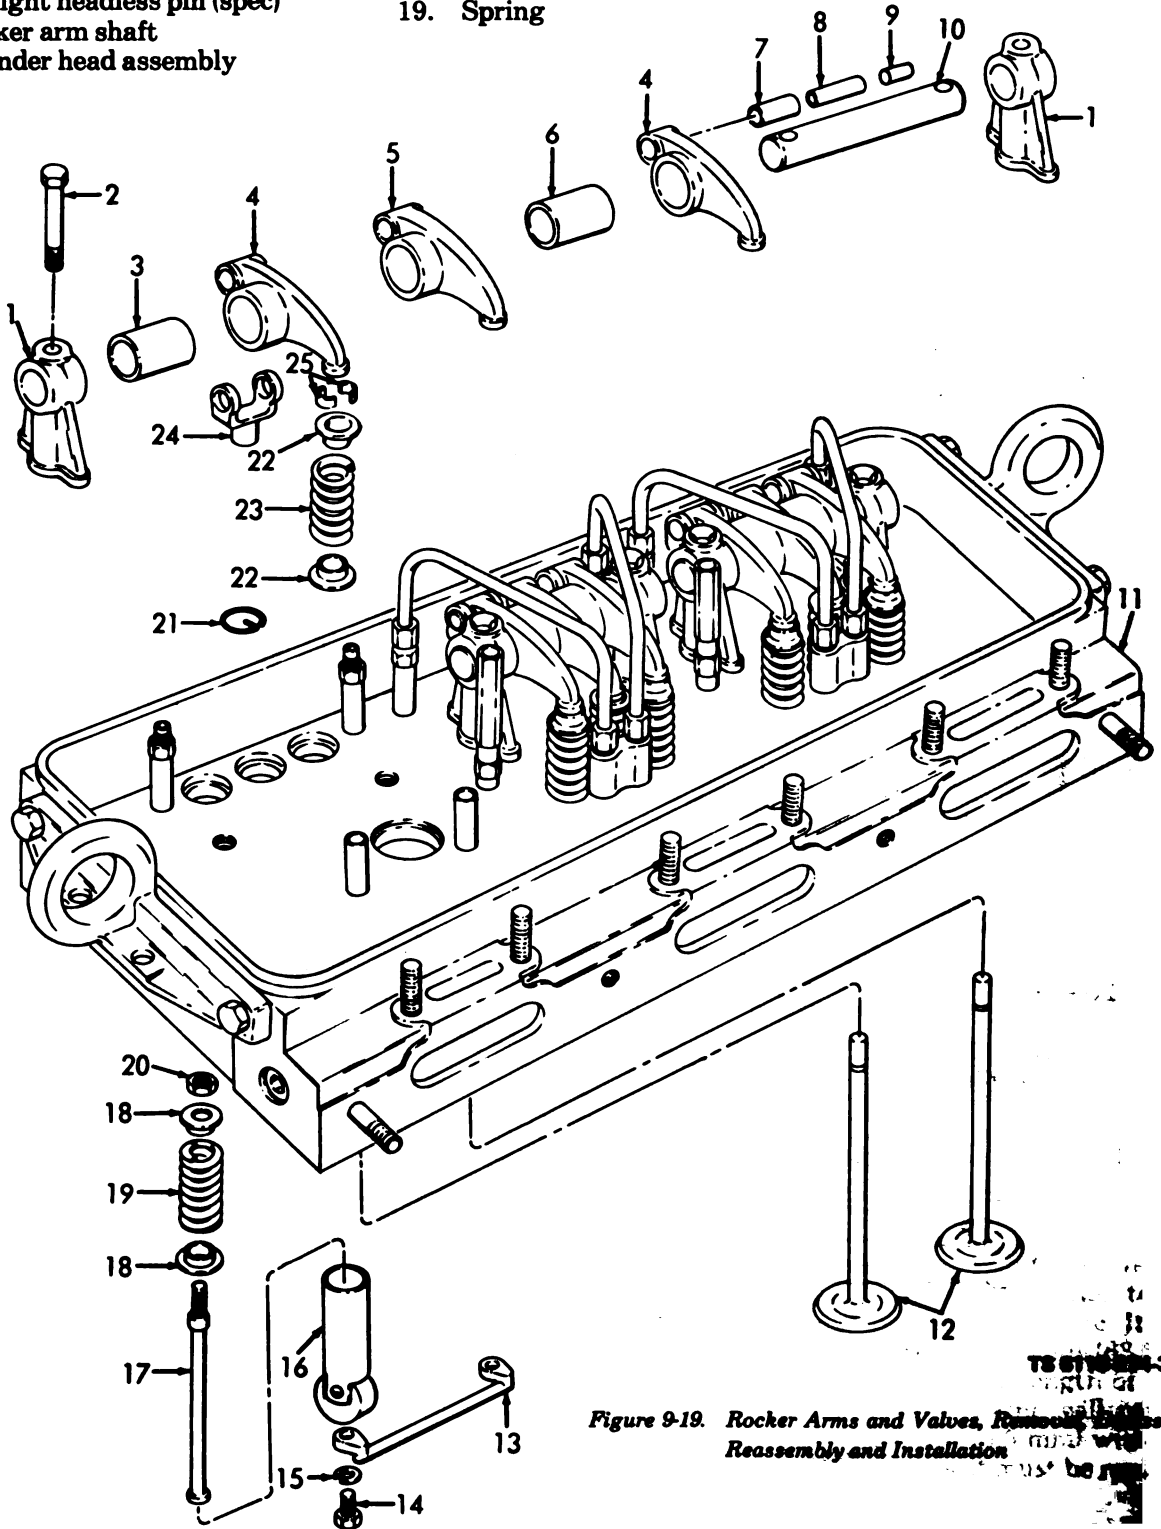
Rocker Arms and Valves, Removal, Disassembly, Reassembly and Installation
